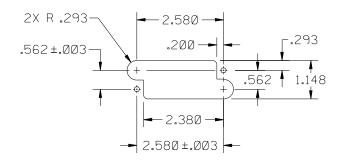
HRF Rack Connector Bar Connector Locations
